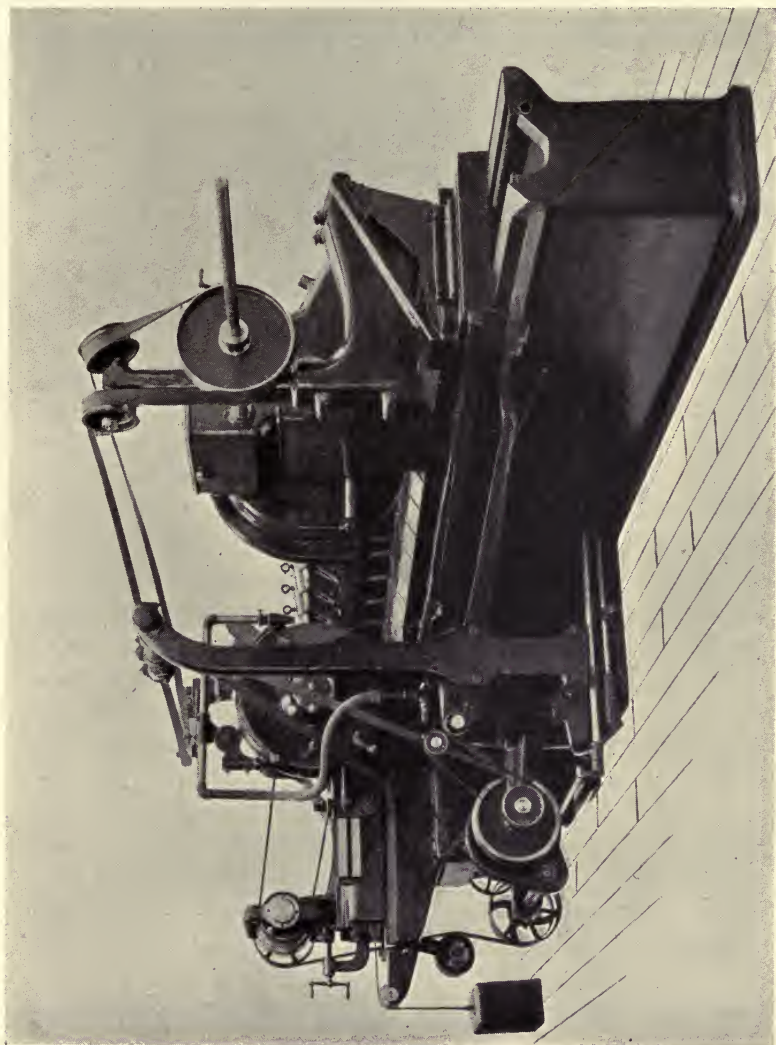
CHURCHILL PLAIN GRINDER, 30" × 120", WITH SELF-CONTAINED WORK DRIVE.
